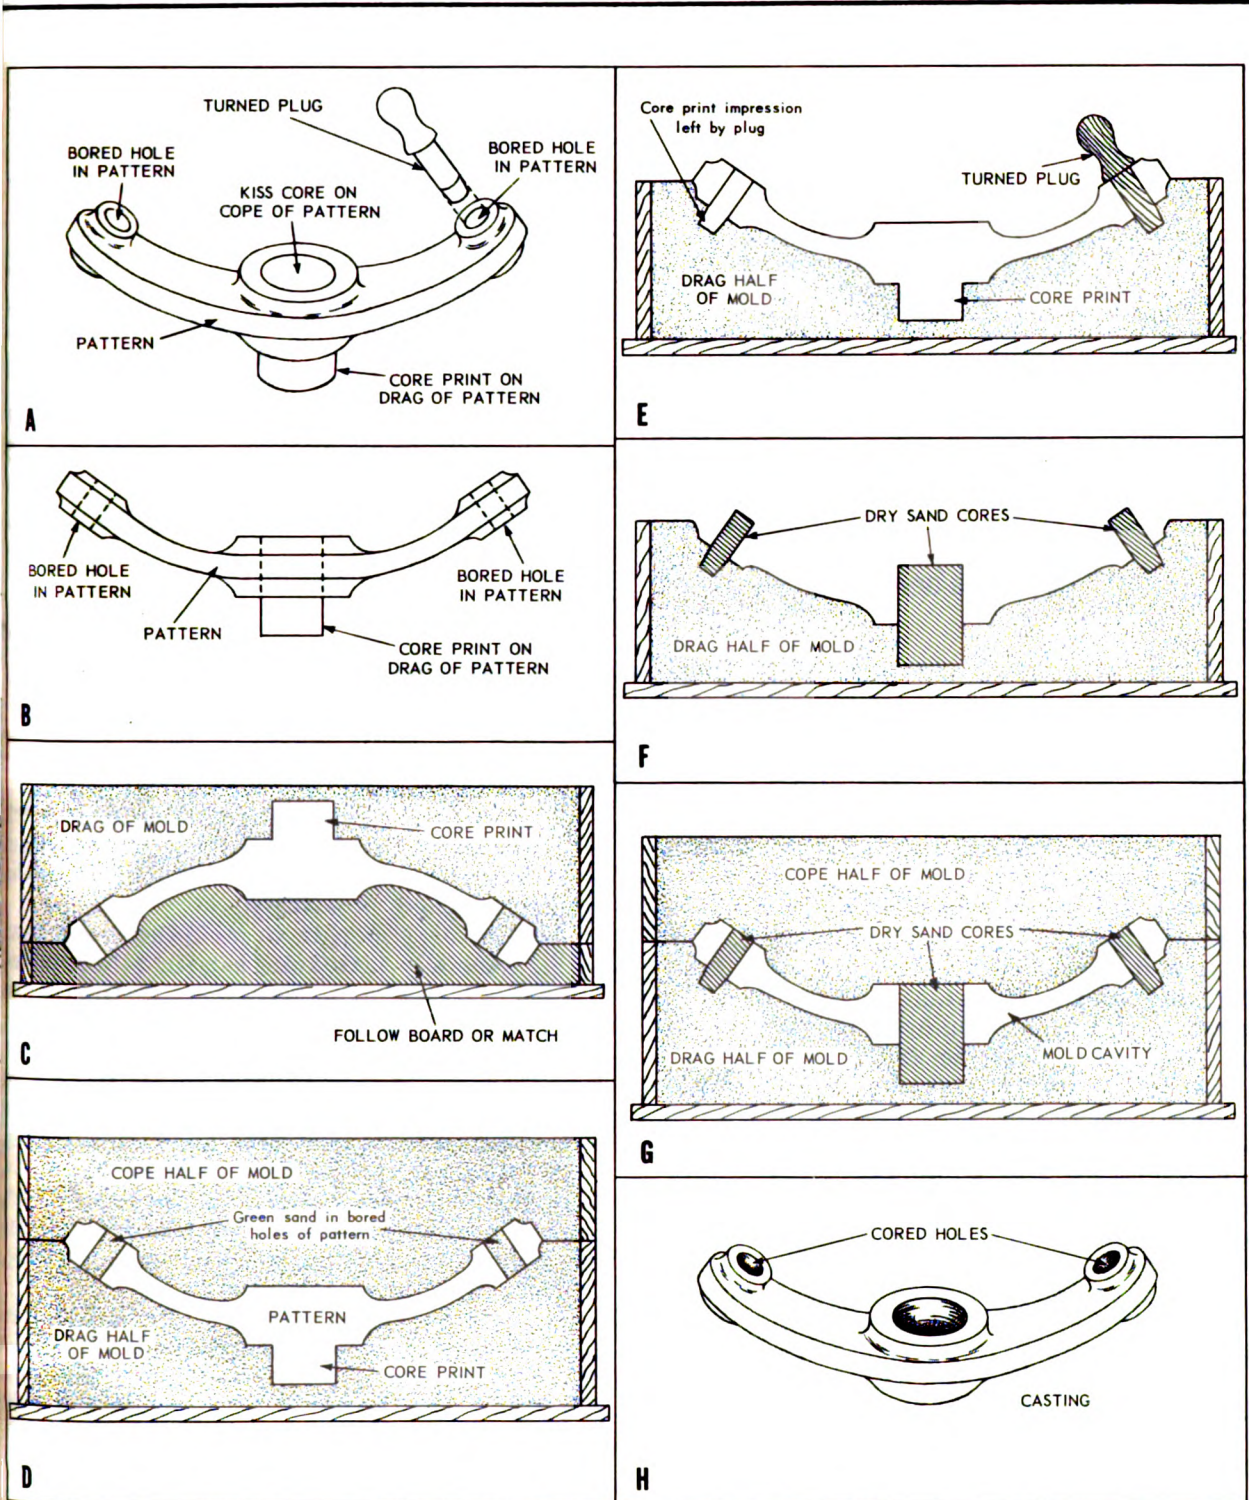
Kiss core application—using one print and using plugged impressions.
